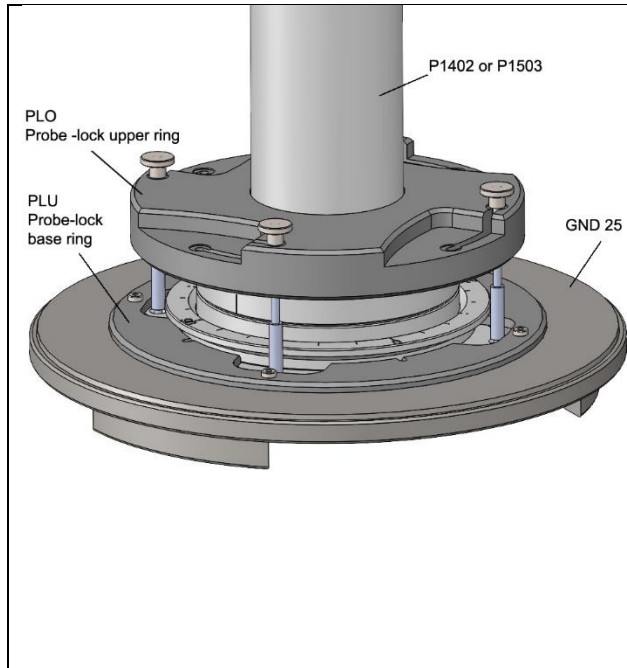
Setup of Probe lock mounted for the P1402 / P1503
